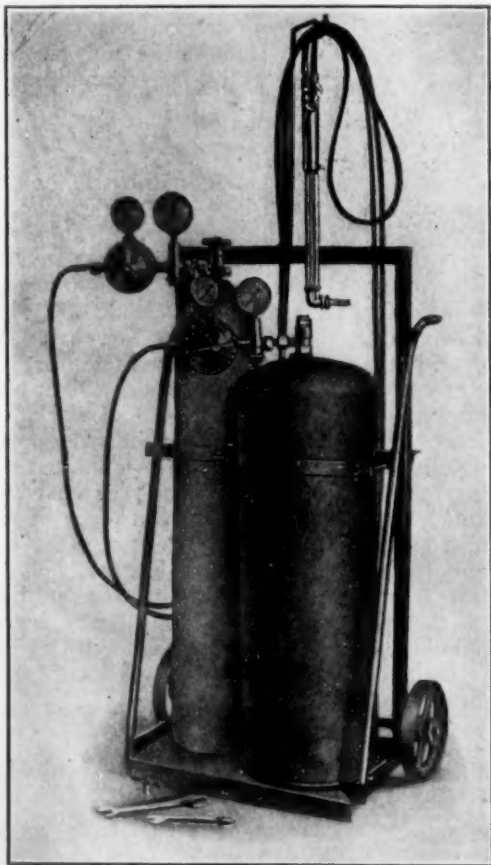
COMPLETE PORTABLE WELDING OR BRAZING OUTFIT.
